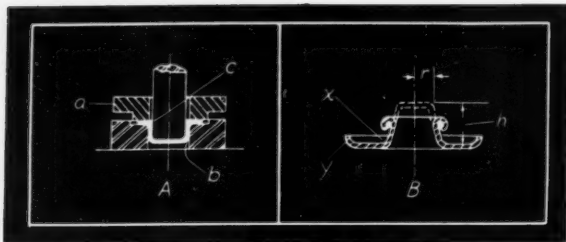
Double acting drawing dies are so constructed that flanges are prevented from wrinkling
